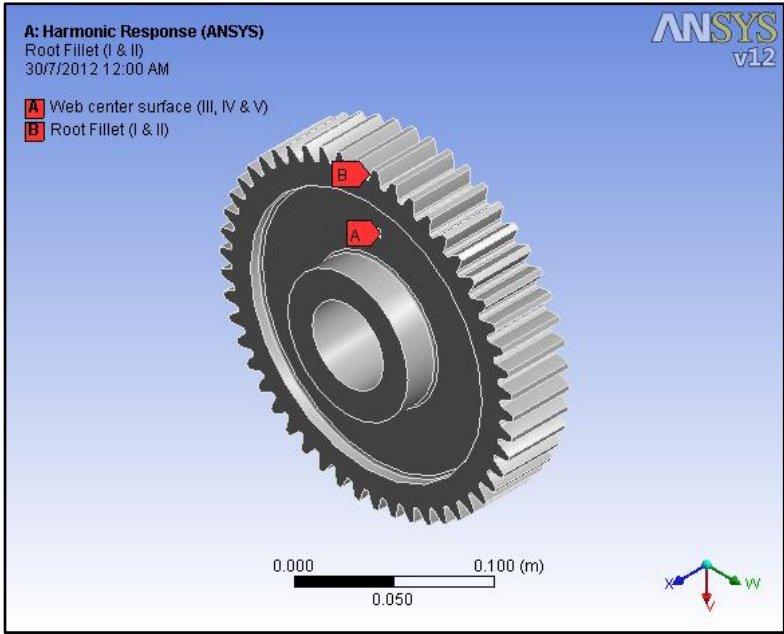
Surface probe at the root fillet and web center surface of Gear A.
